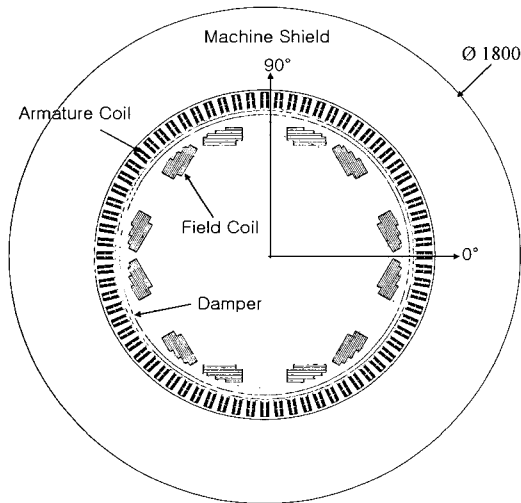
Cross-sectional view of 5 MW air-cored type HTS motor, Case I (mm dimension).
